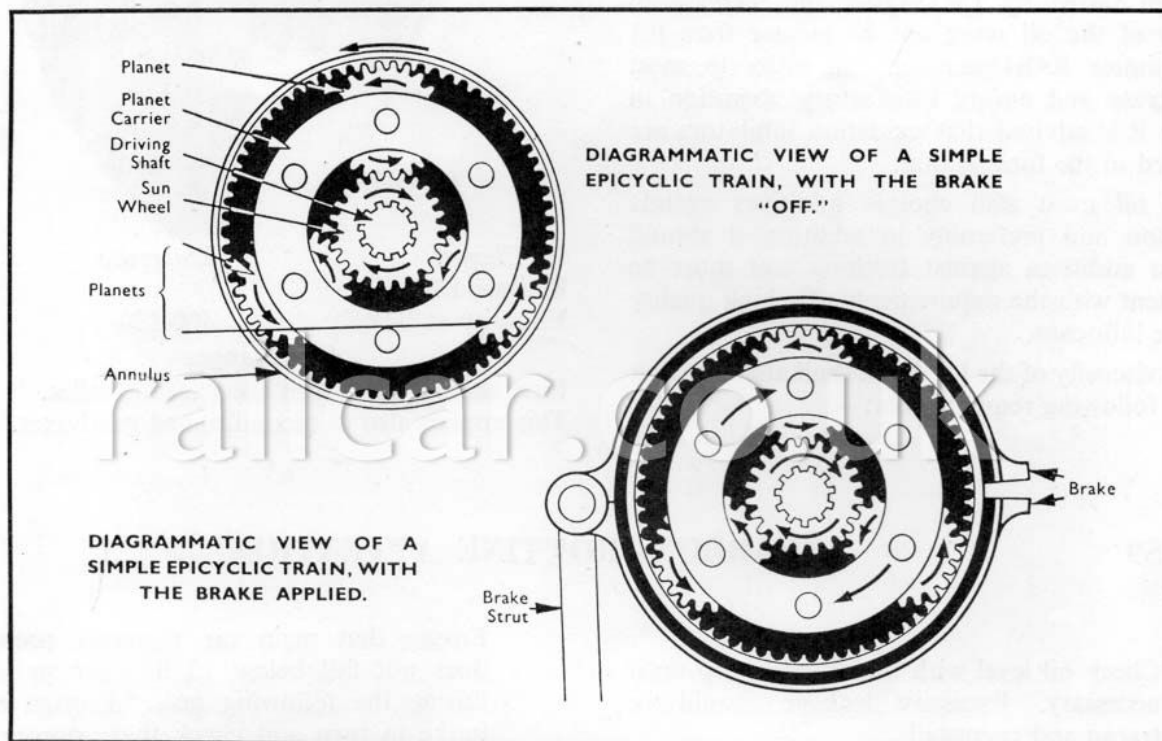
Diagrammatic View of Epicyclic Gear Train.
